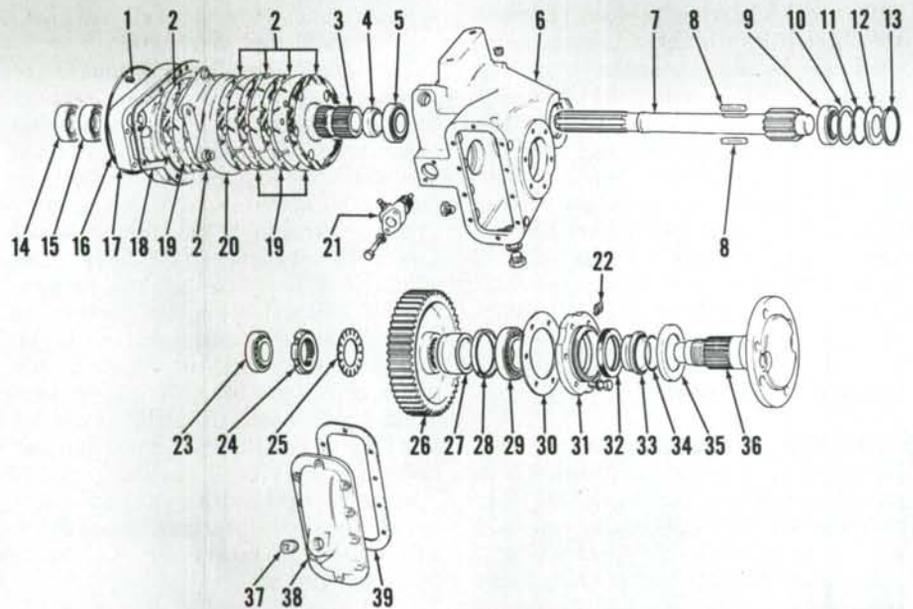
Exploded view of Model 1490 final drive assembly. Final drive used on Model 1494 is similar.
